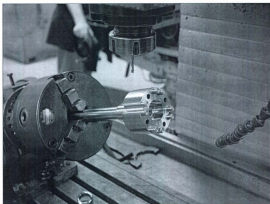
Shaft mounted in an angled indexing head for milling of the starting flat.
